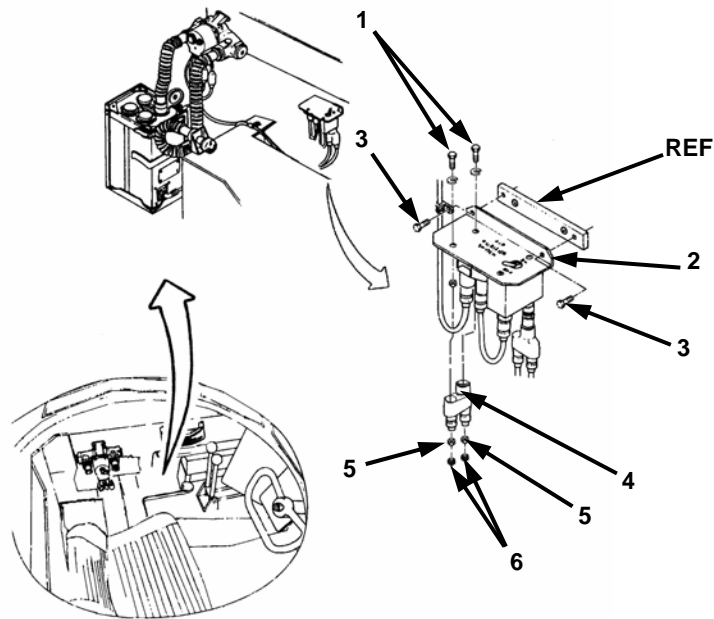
MCU Coolant Umbilical BCA Installation.
